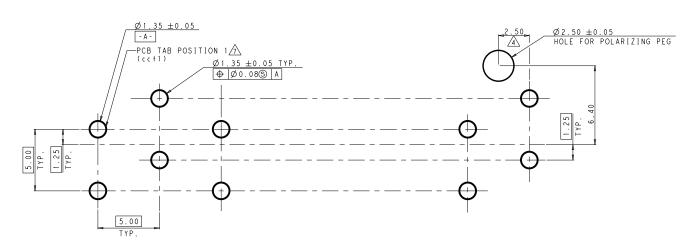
Recommend Pcb Layout - Component Side Pcb 1.5 $\pm$ 0.2 Thick
